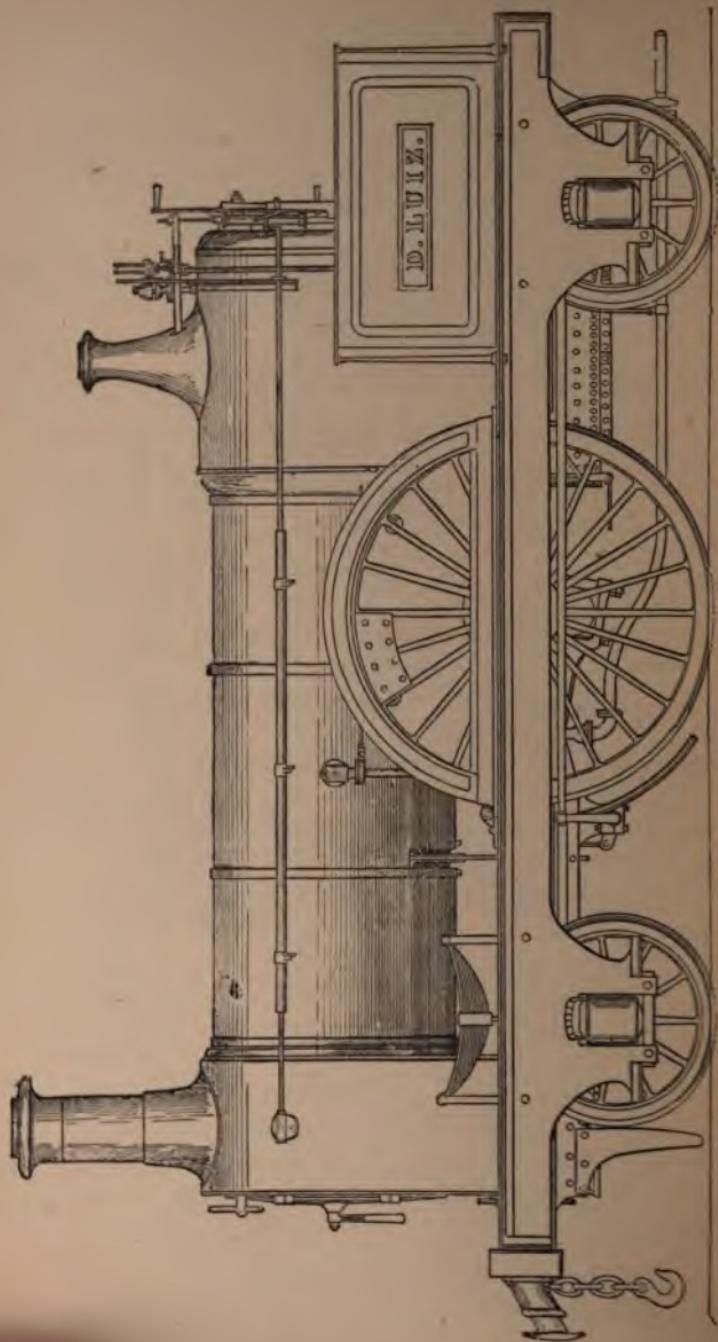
Express Passenger Locomotive, constructed by Messrs. Boyer, Peacock, and Co.
